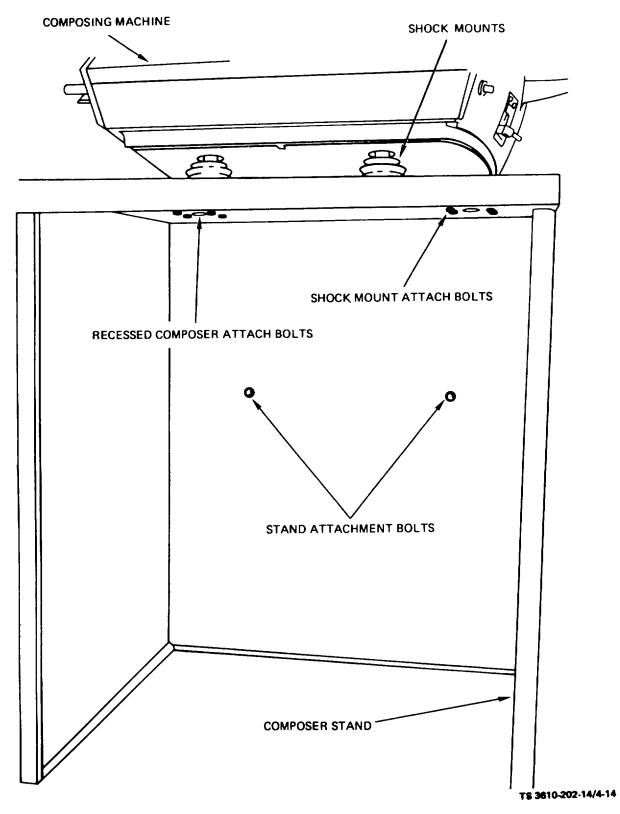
Type Composing Machine and Stand, Removal and Installation
